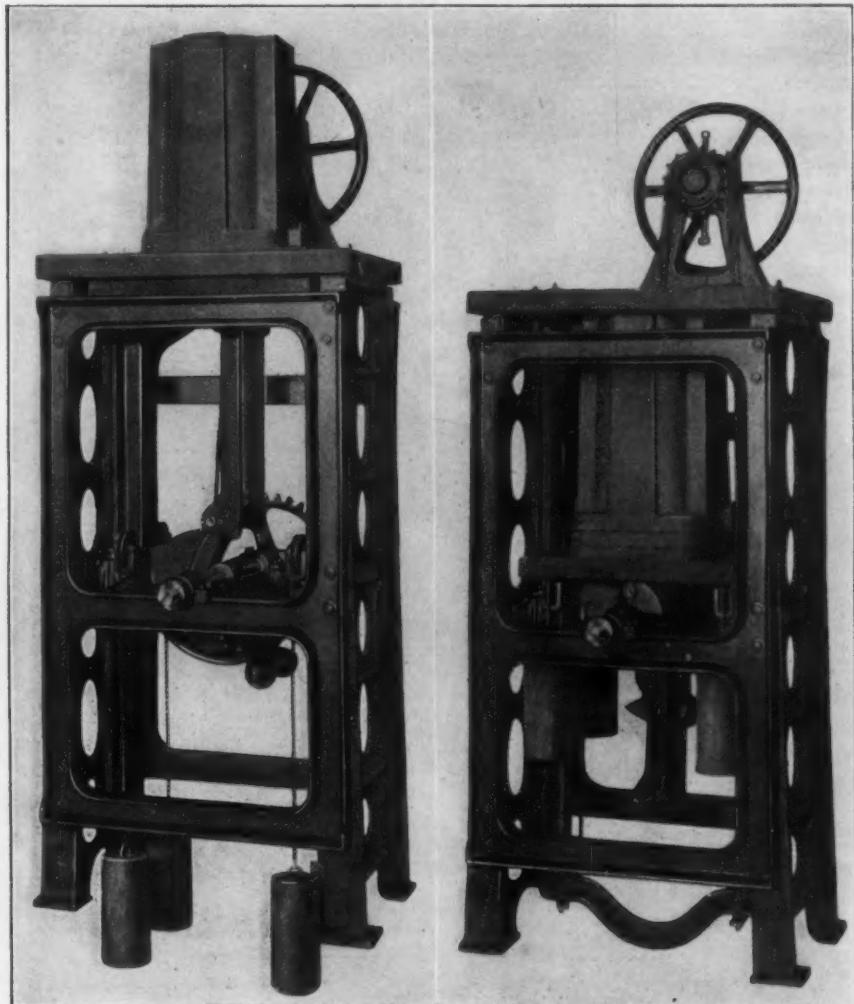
The Osborn Special 36-In. Draw Machine with Pattern in Position for Ramming the Cope and Withdrawn.
